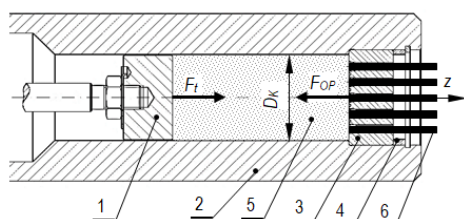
Piston-type extrusion assembly 1 – piston, 2 – extrusion tube, 3 – multi-channel die, 4 – spacing ring, 5 – dry ice snow, 6 – compressed dry ice snow
